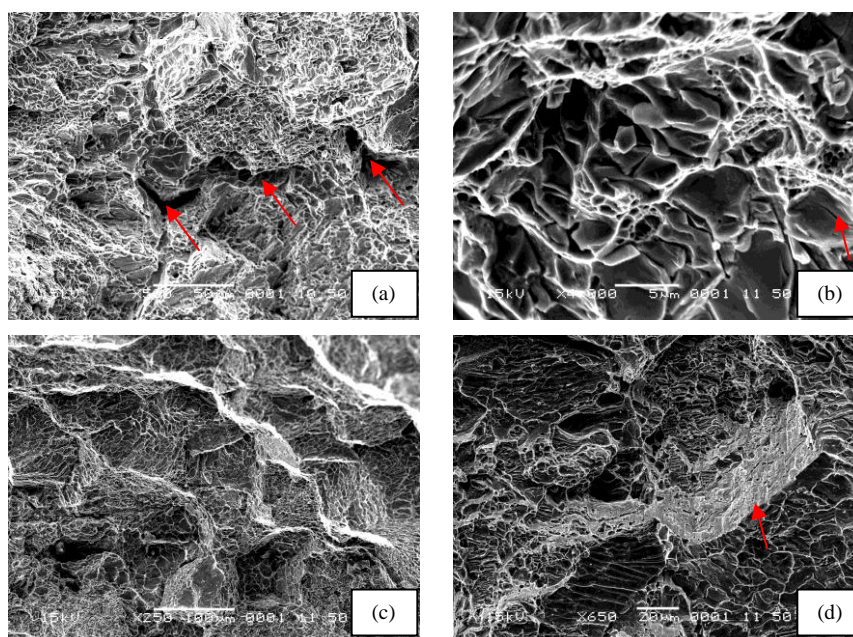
SEM views- Fractographic examination on ring 2.2 after failed the flattening test:(a)-Intergranular fissures, non-random ductile fracture involving coalescence of voids (b)- hard particles, brittle fracture, typical crack (river mark) on hard particles as indicated by the arrow, (c)-intergranular cracking(d)- grain boundary facet
